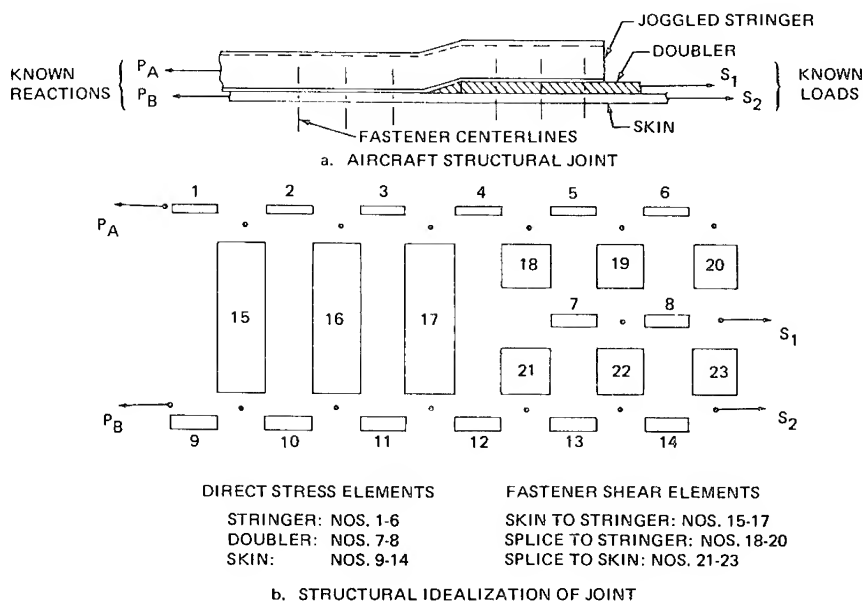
Typical structural joint and engineering idealization used to obtain load carried by each fastener.
